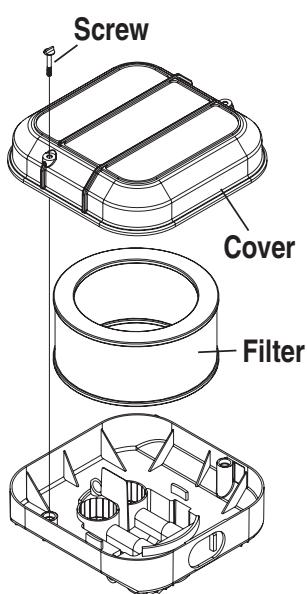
13, 16 & 18kW Engine Air Cleaner
